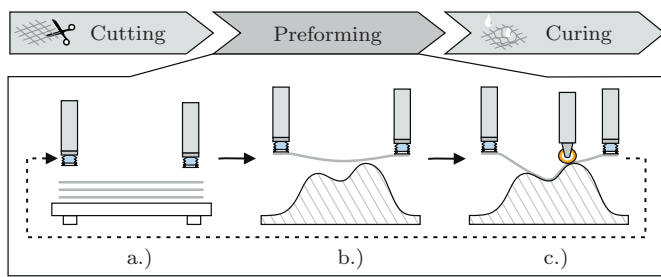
Schematic of the injection method and the preforming process: a.) Pick-up from cutter/storage, b.) Transfer to mold, c.) Lay-up on mold.
